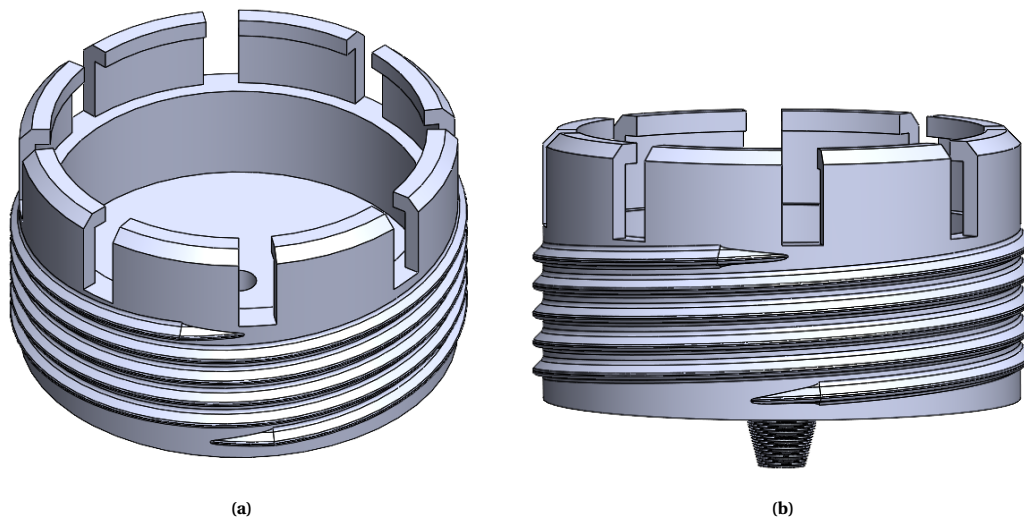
The locking guide to be used in the Compact Drilling System. a: isometric view, b: rotated to show the tip. This tip can be twisted onto a threaded hole in a locking plate, such as the one pictured in figure 3.3.
